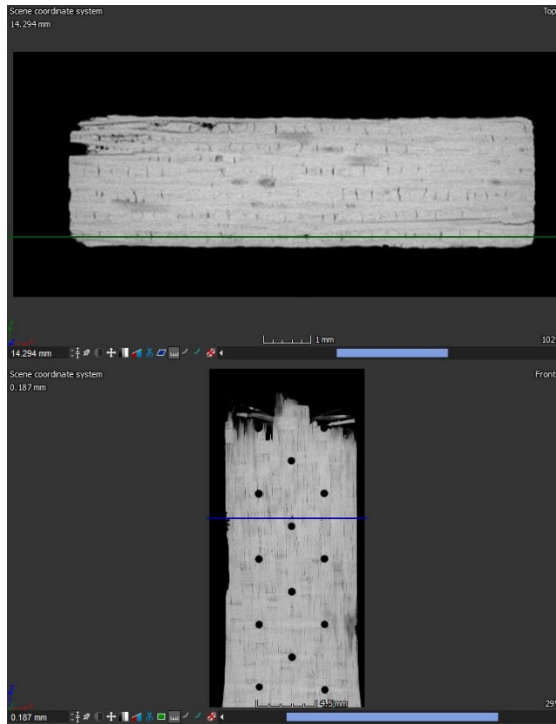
2D (x-z plane) vs 2D (x-y plane) location showing damage zone at Step 5 for specimen #3, tested in tension to failure at 1200°C in air
